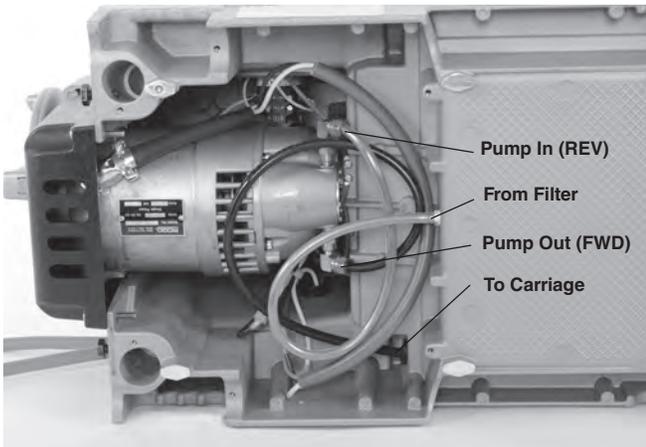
A – Oil Pump Connections for Left Hand Threading (Switch in REV)
